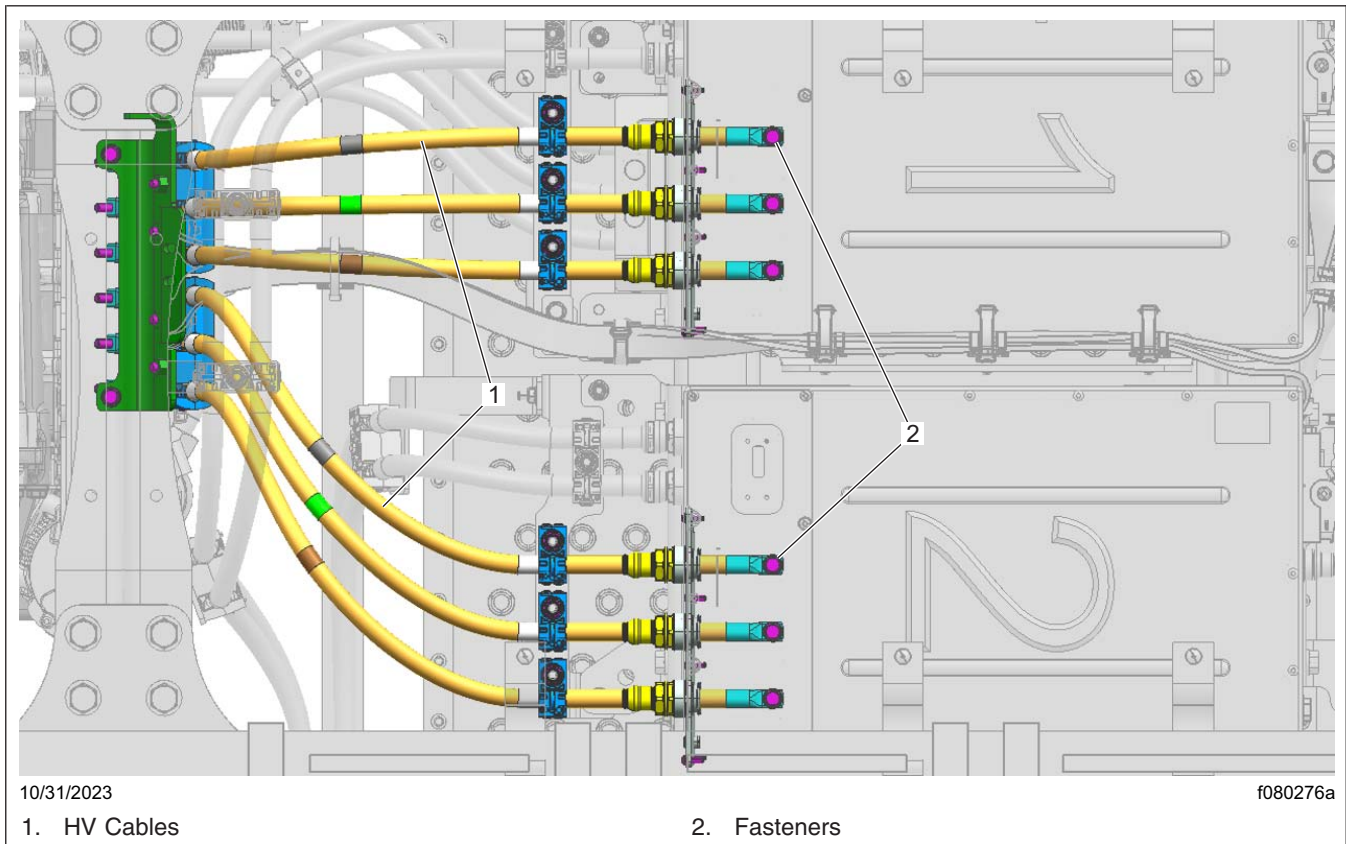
, HV Cables Connecting the Inverter and the Forward Rear Axle
